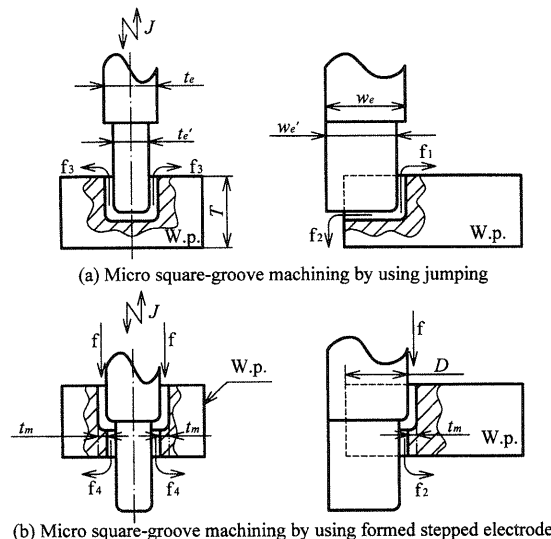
Micro square-groove machining by using jumping and formed stepped electrode
